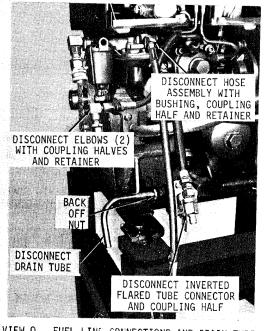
Auxiliary power unit-disassembly and assembly (Sheet 3 of 6).
